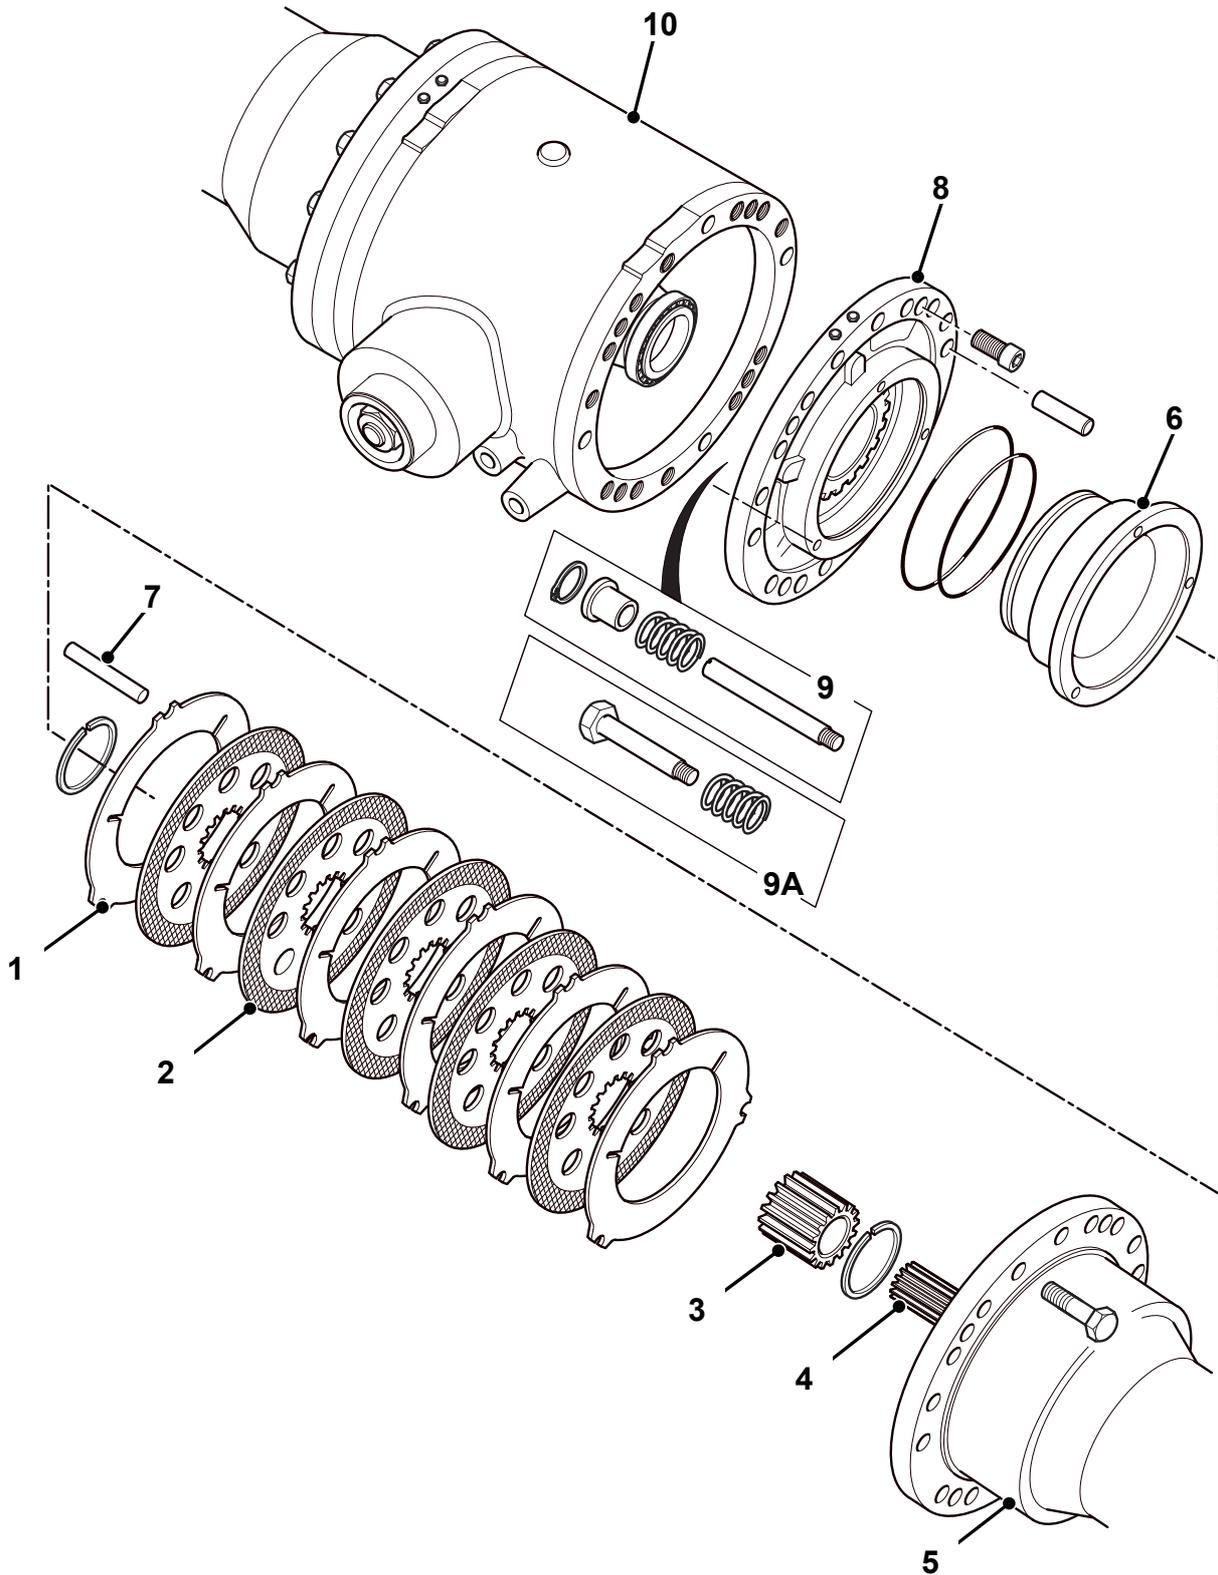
70 Series Integral Brakes (3 Piece Axles)
